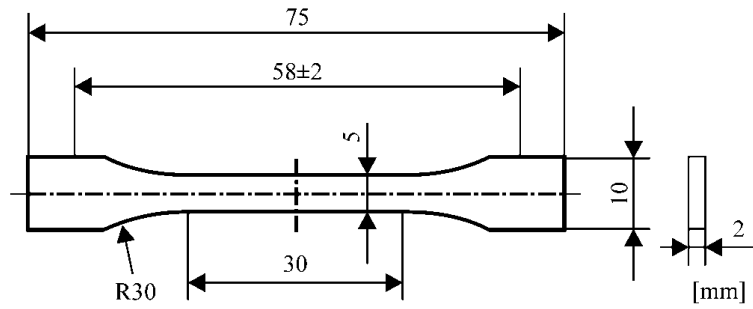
Dumbbell shaped specimen (JIS K 7113 1(1/2)).
